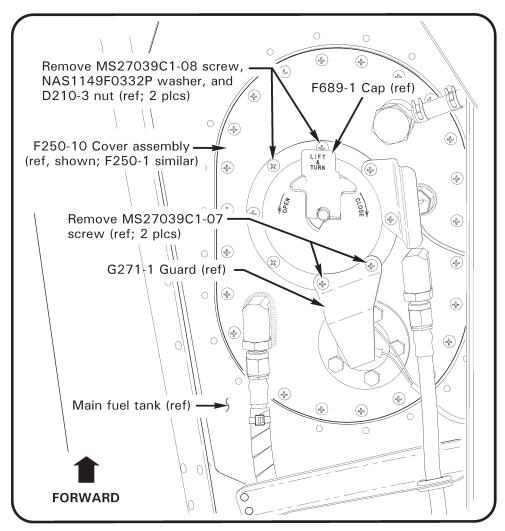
Main fuel bladder F250 cover assembly (F250-10 cover shown)
